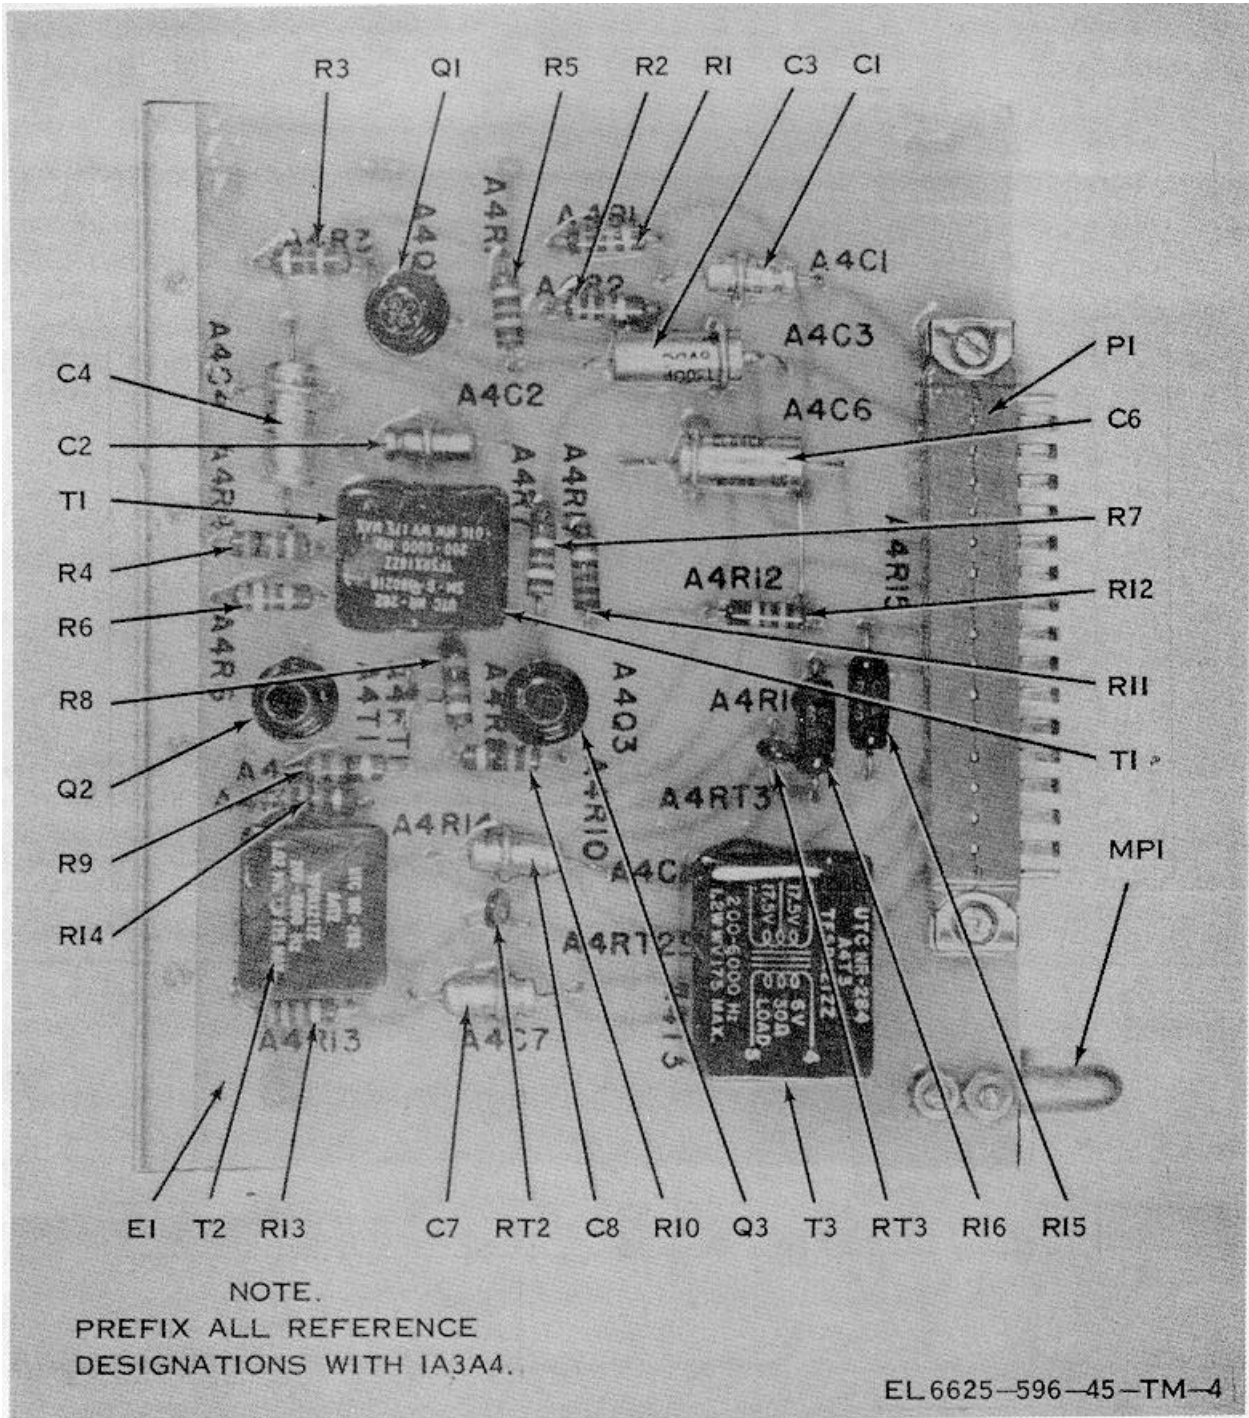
Power amplifier assembly 1A3A4, parts location.
